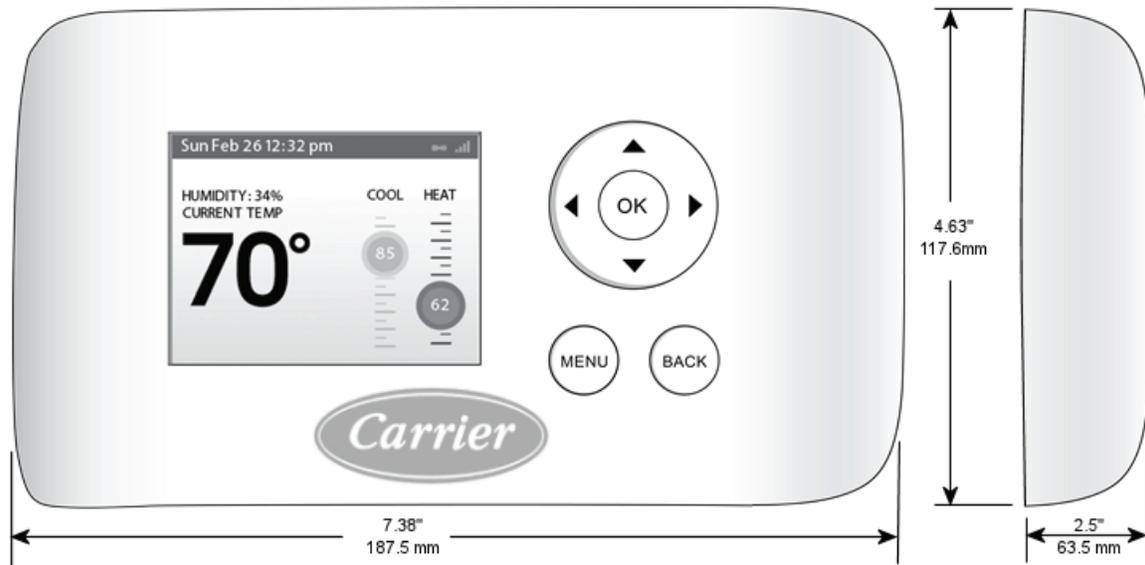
Carrier Wi-Fi Thermostat Dimensions
